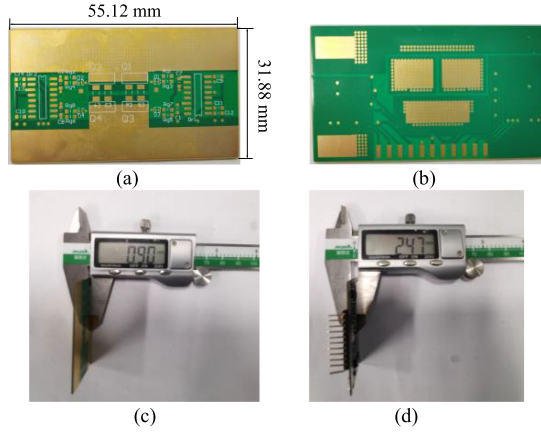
Figure of the realized PEGM. (a) Top view, (b) bottom view, (c) side view without soldered components, and (d) side view with soldered components.
